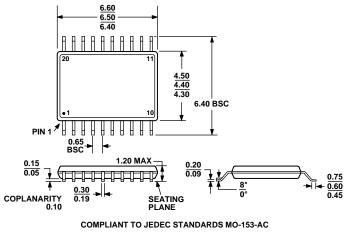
20-Lead Thin Shrink Small Outline Package [TSSOP] (RU-20) Dimensions shown in millimeters
